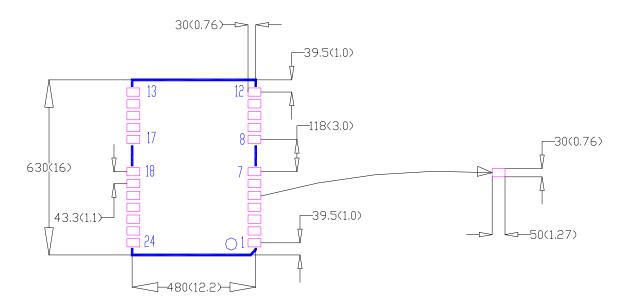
UM220-IV NV-GN Recommended PCB Packaging (unit: mil, in brackets: mm)
